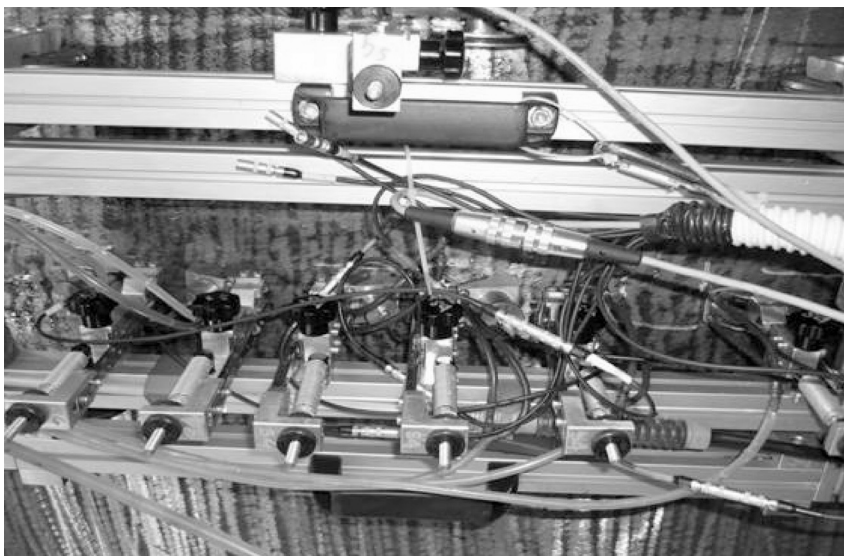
Example of scanner during parallel scanning on 300 mm welds for reheat cracks detection
